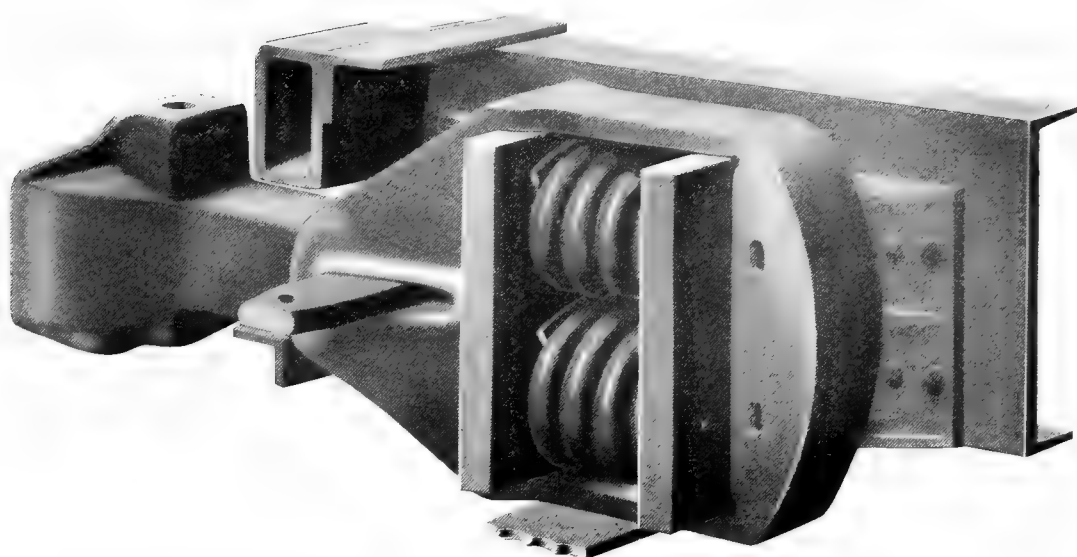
Application of Buckeye Cast Steel Keyed Yoke for Twin Spring Gears.
